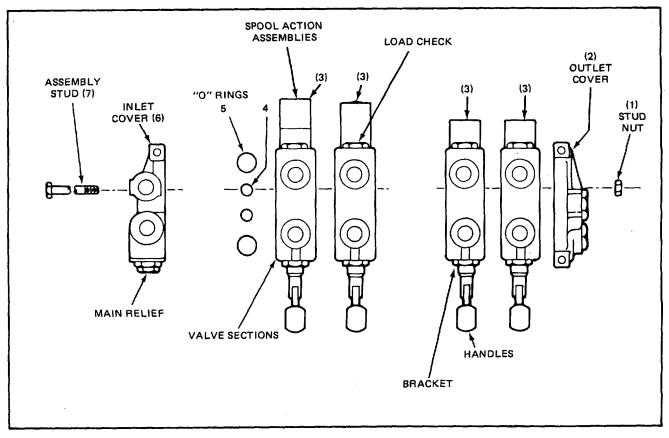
Model V20 Directional Control Valve, Typical Main Assembly
